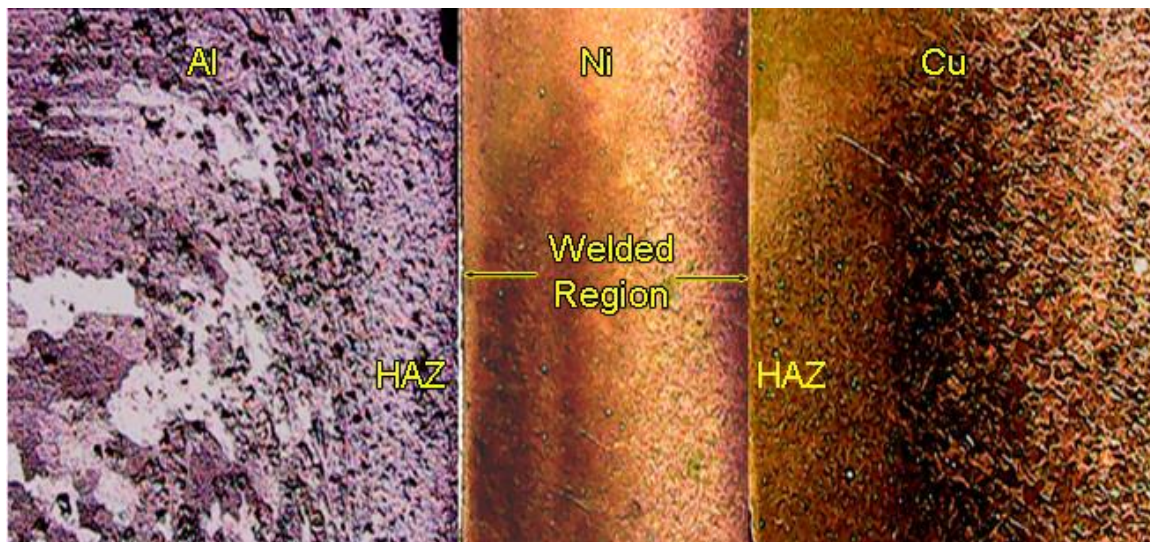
friction welded Al-Ni-Cu (Sample 7)
